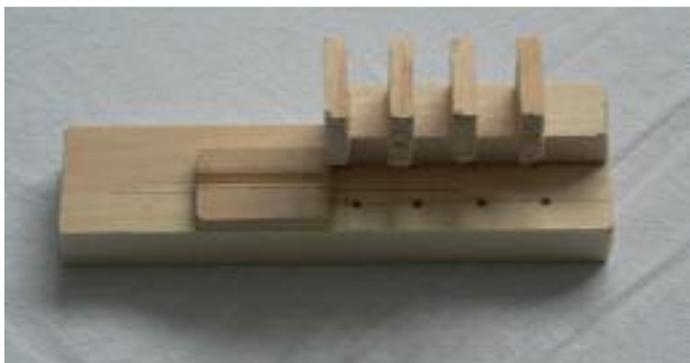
Assembly jig for searchlight signals. The jig in its current form can only be used for signals where the target is offset left, but could easily be modified to also allow offset right assembly.
